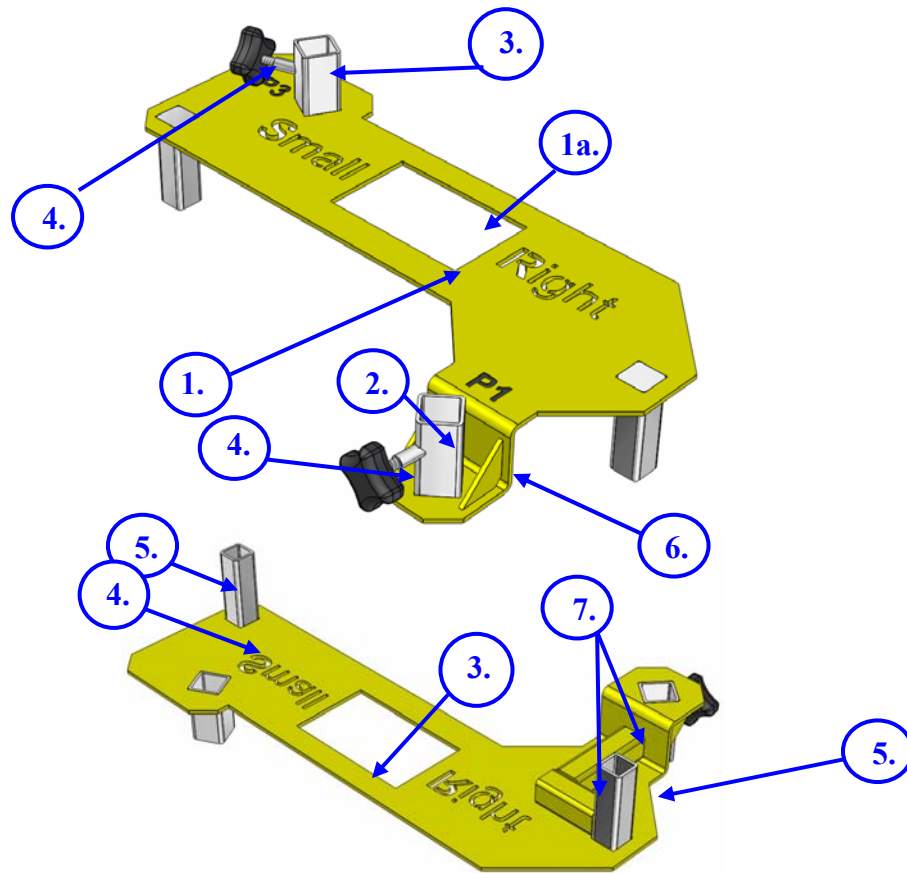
Structure of the S size orthosis holder plate. (Top and bottom views)
